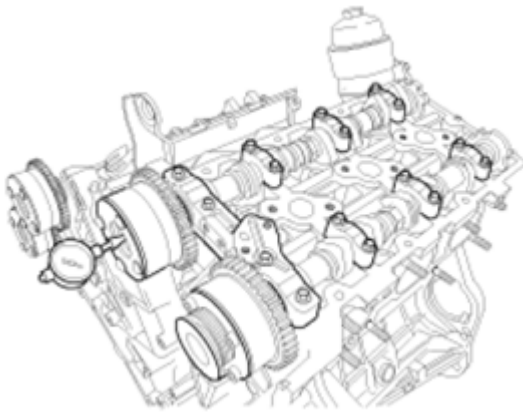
Measuring Camshaft End Play Using Dial Indicator
